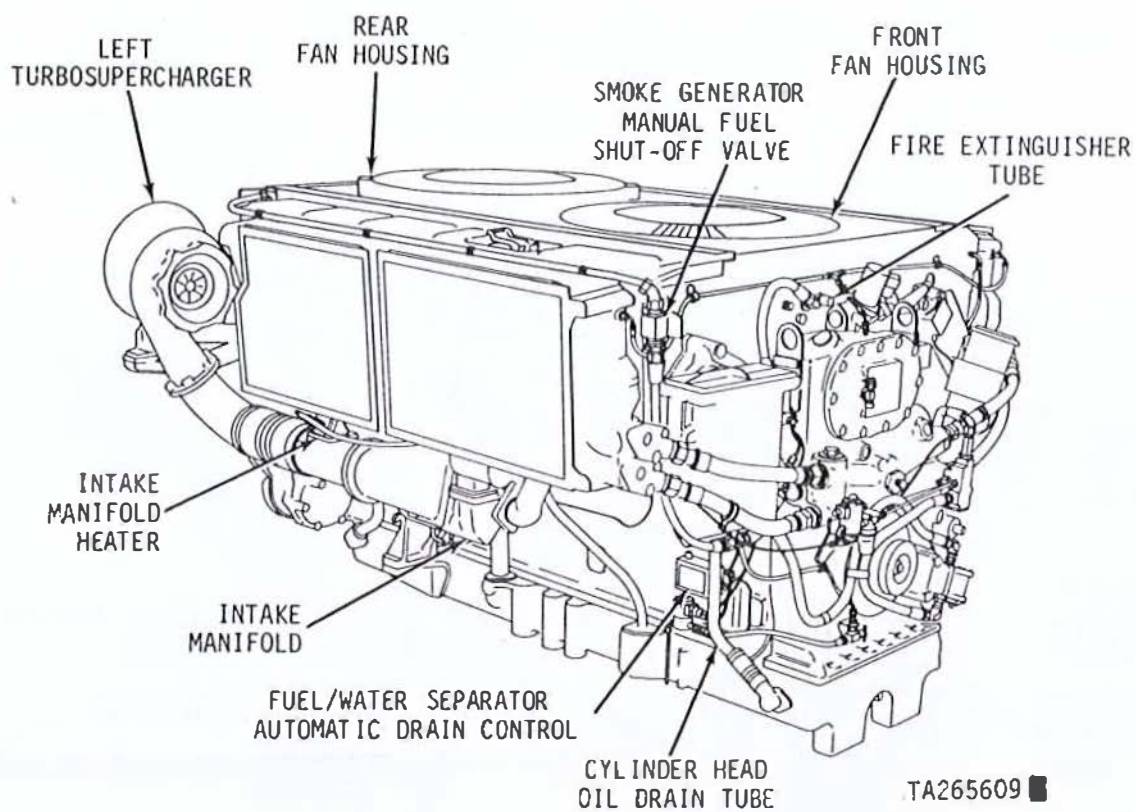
AVDS-1790-2DR engine assembly - left front view.
